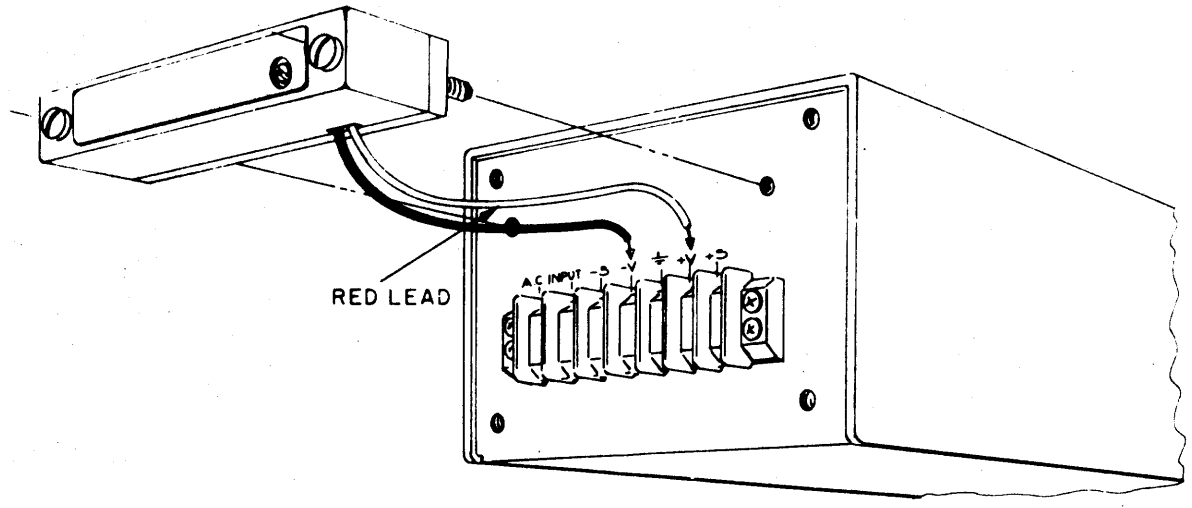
Overvoltage Protector, Typical Horizontal Mounting
